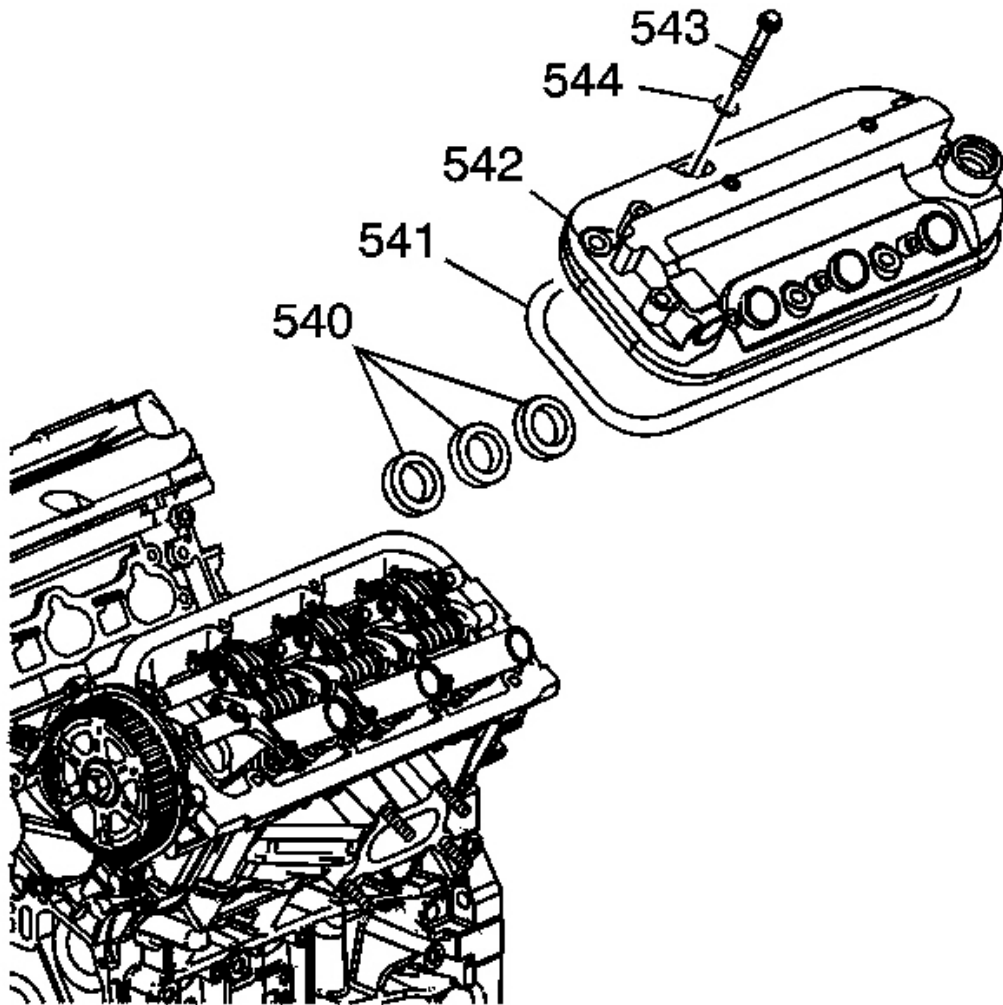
View Of Seals, Gasket, Cover, Grommets & Bolts
